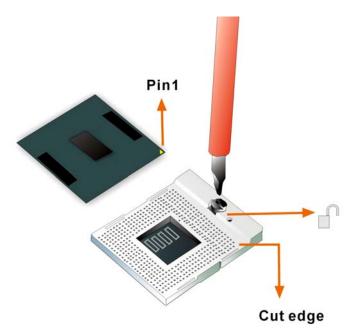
Make sure the CPU socket retention screw is unlocked
